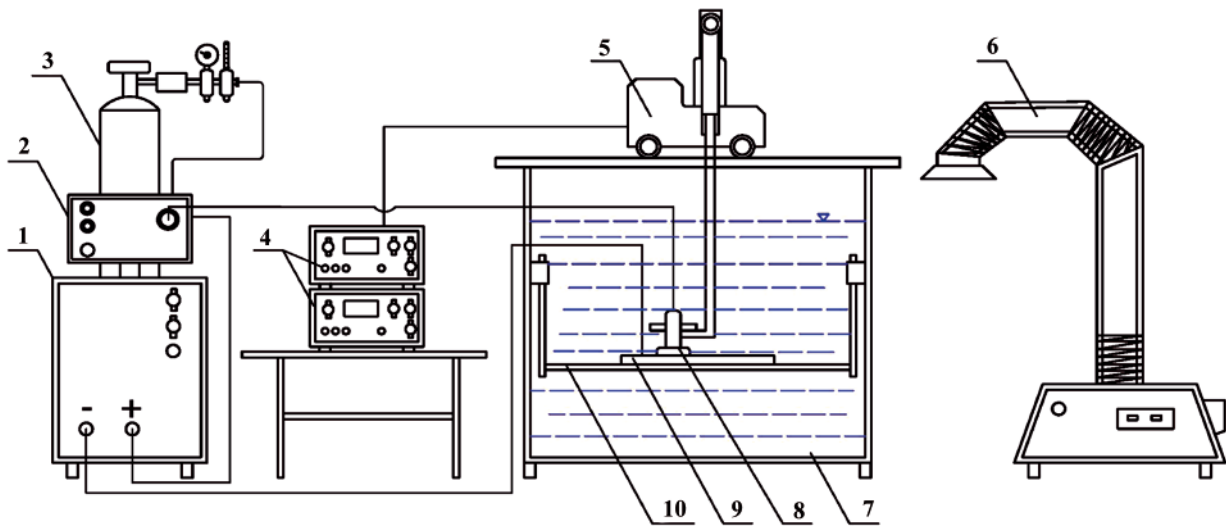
The diagram of the underwater welding at shallow depths; 1) welding power source, 2) wire feeder, 3) gas cylinder, 4) power source of trolley, 5) welding trolley, 6) welding fume extractor, 7) tank, 8) torch with the local dry chamber, 9) plate, 10) table
